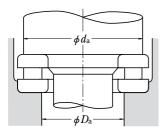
Face Supporting Diameters for Thrust Roller Bearings
